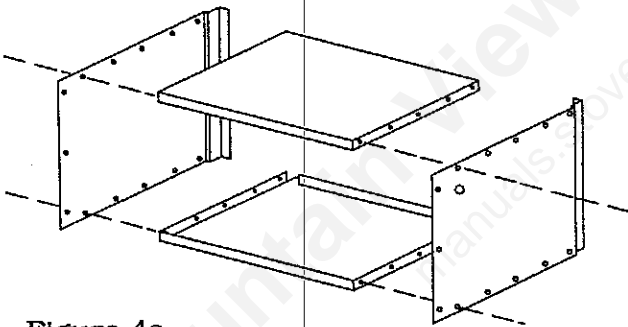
ASSEMBLE FILTER BOX USING THE SCREWS PROVIDED. NOTE: THE SIDE WITH THE 1" HOLE IN THE CORNER MUST BE MOUNTED ON THE RIGHT SIDE OF THE UNIT.
